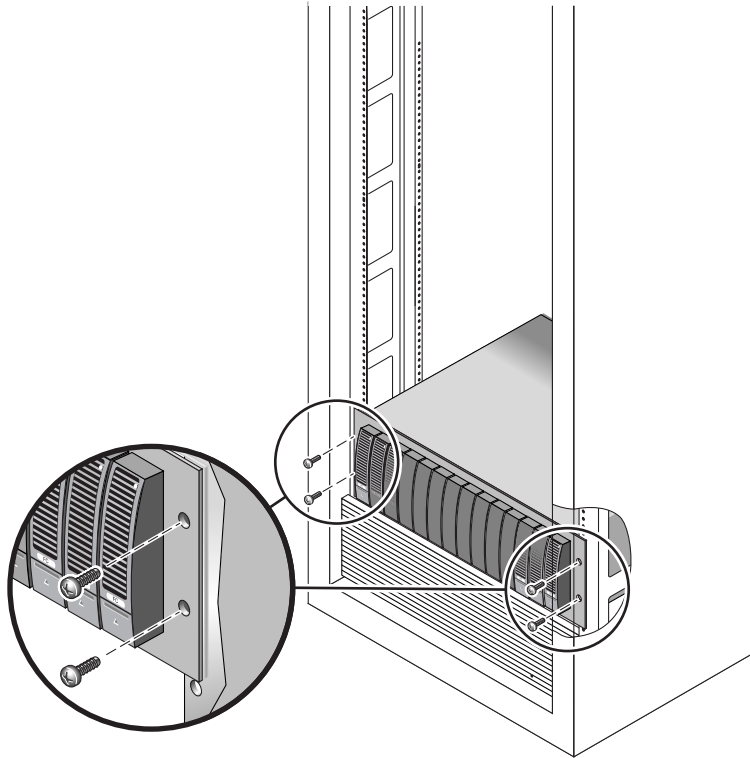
Securing the Enclosure to the Front of a Sun StorEdge Expansion Cabinet
